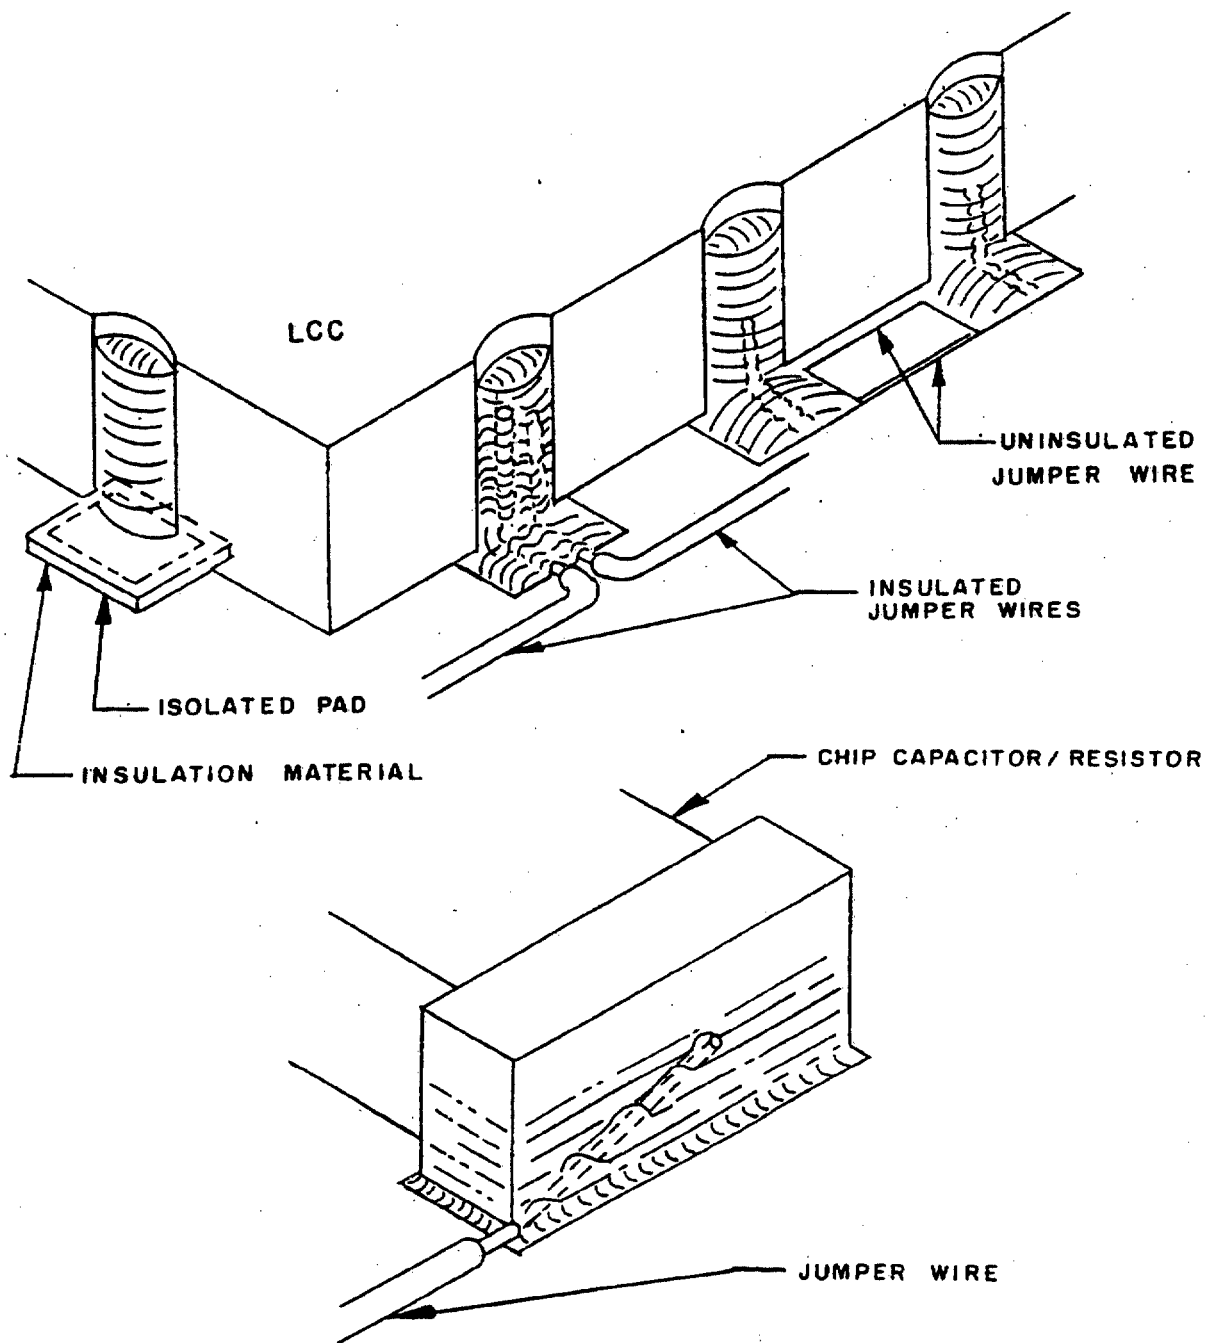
Portions of jumper wire contour visible in completed solder connection.
